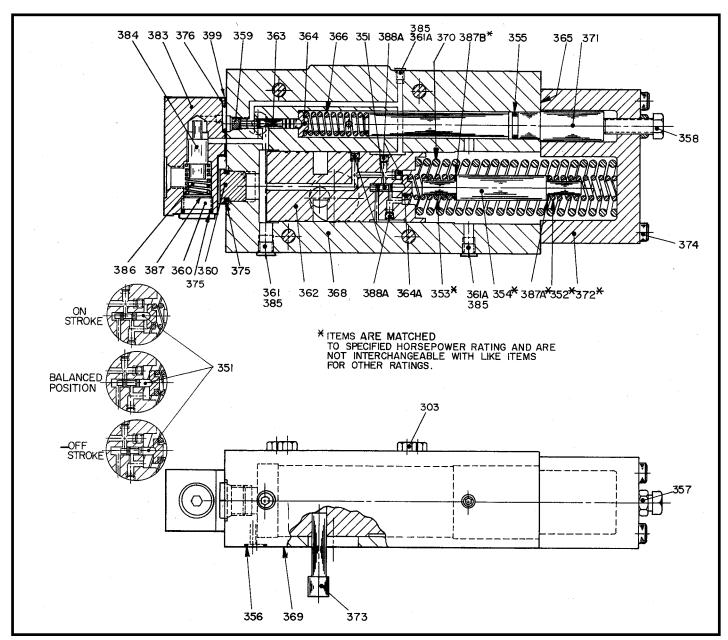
Parts Drawing, Oilgear Type "HF" Control (E51197).
